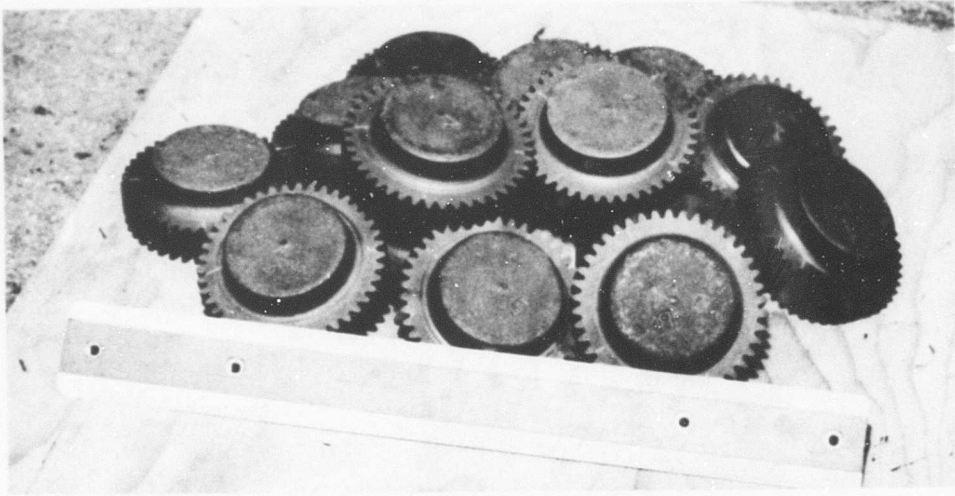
As-Forged 3-Inch Gears with Integral Teeth with Flash Removed.
